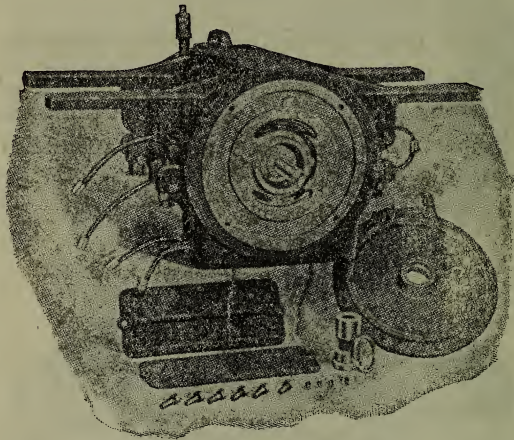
END VIEW OF GENERATOR, SHOWING BEARING HEAD AND HAND HOLE COVER REMOVED, EXPOSING AUTOMATIC BRUSH MECHANISM.
